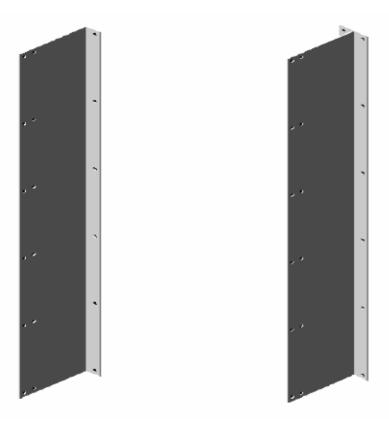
Split vertical connector (left) used for corners and vertical connector (right) used for joining adjacent bins
